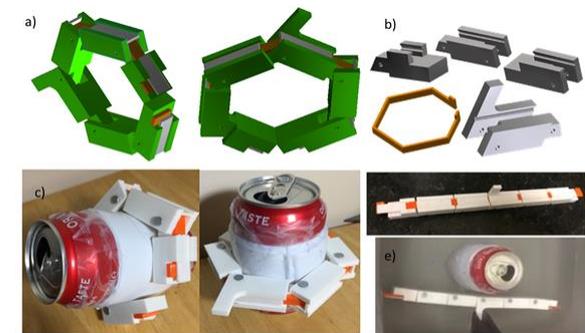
Gripper 1 a) CAD assembly b) CAD components c) demonstration of grip d) temporary shape e) testing the Gripper1
